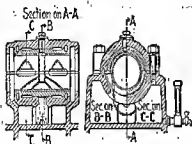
Split Bearing with One Chain. Main Crankshaft Bearing. Vertical Oil Engine.
